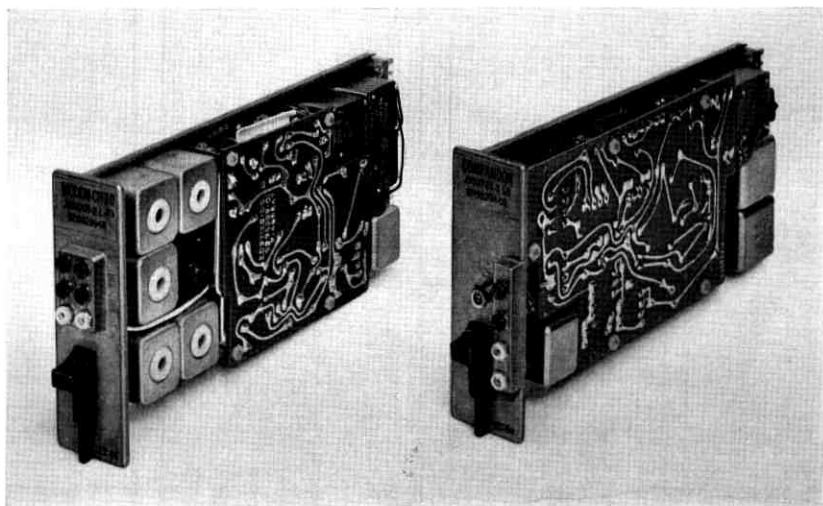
Comandor (a) and modem (b) fabricated by “sandwiching” printed wiring board and Amplas assembly.
